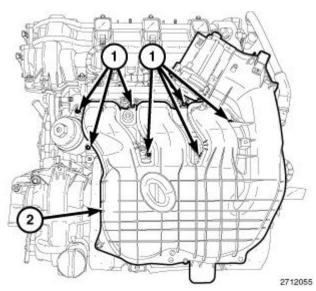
Upper Intake Manifold & Bolts Courtesy of CHRYSLER GROUP, LLC
